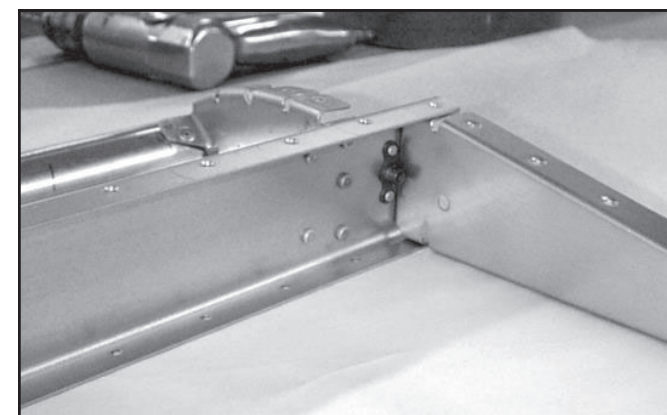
A rear view of the inboard end, showing the platenut riveted to the spar.
